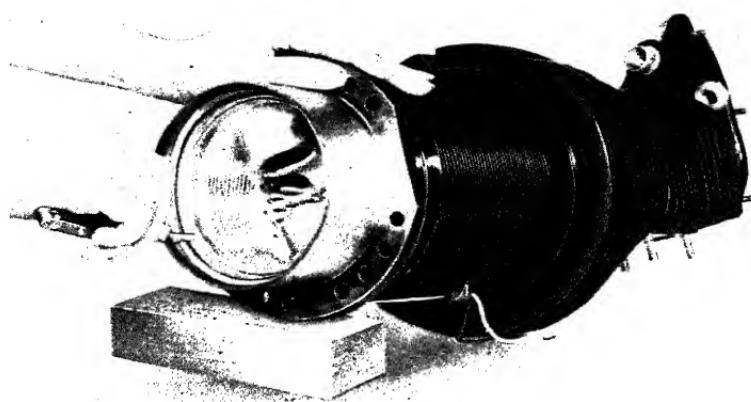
Gaps in piston rings are best checked in the cylinder bore.
